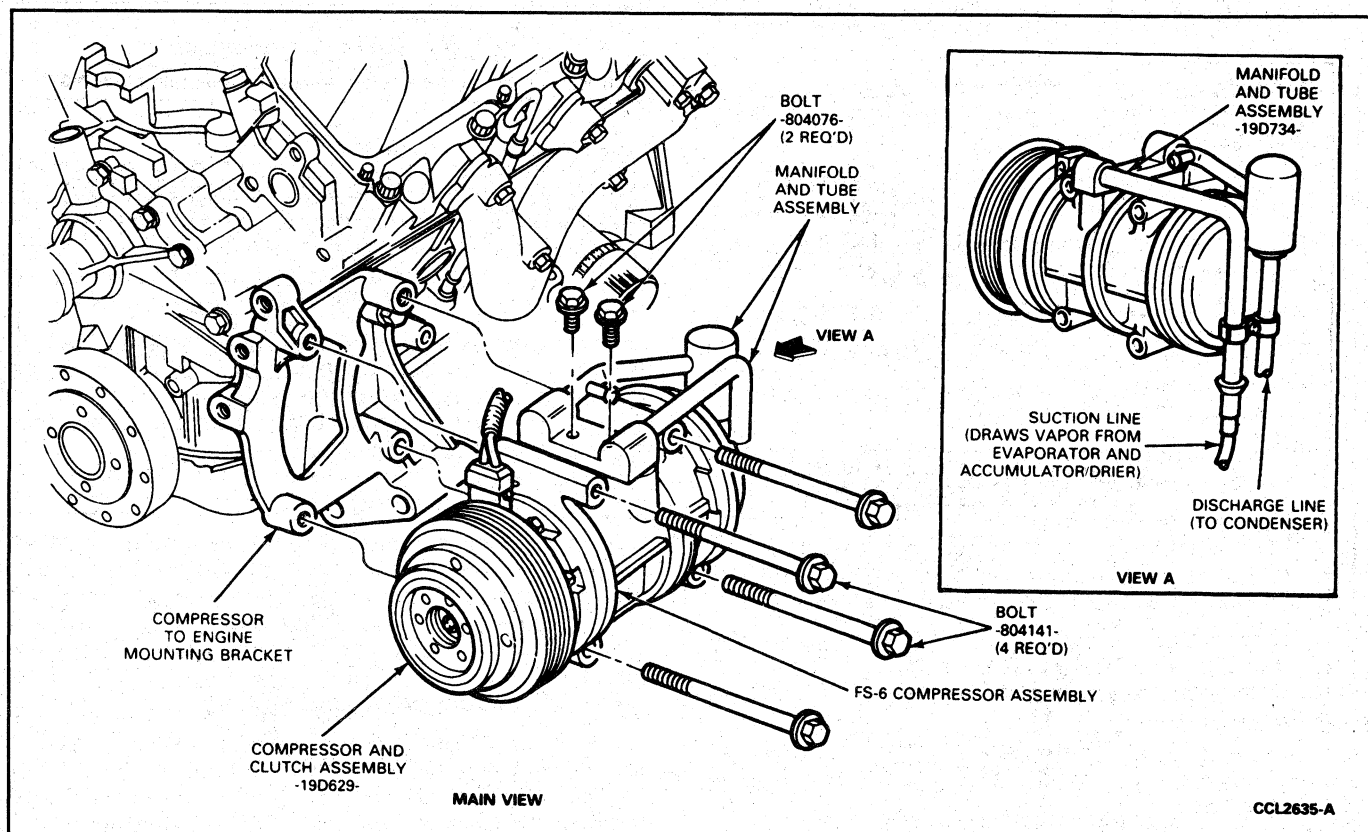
Compressor and Magnetic Clutch Installation—3.0L Engine
